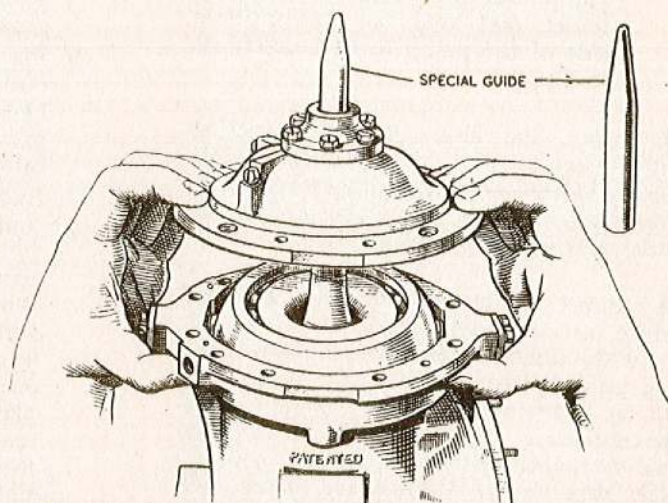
Assembling cam-plate housing to pump housing, using special guide
